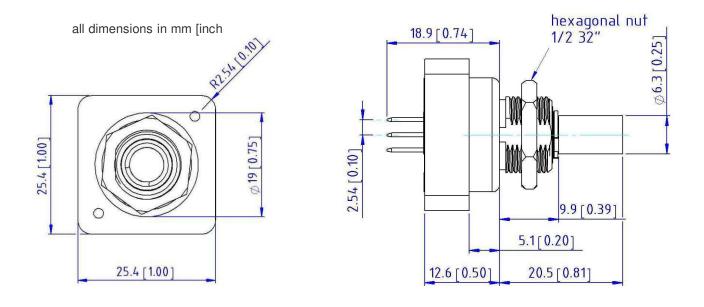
Dimensions of the ED-18-BB-XXXX-X-X (top and side view)
